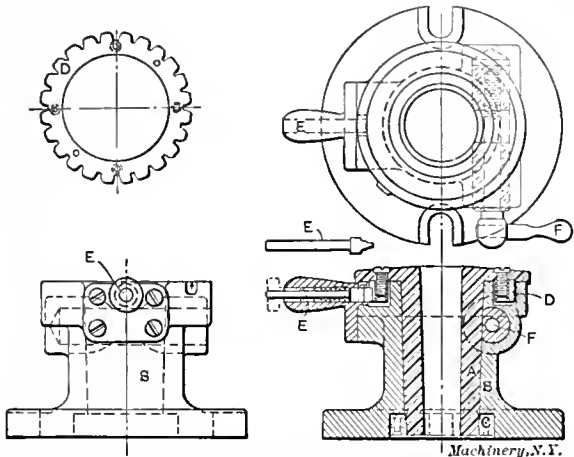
Elevation, Section and Plan, showing Construction of the Vertical Indexing Head.
